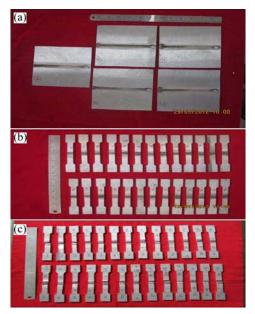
Photographs of welded joints and tensile specimen: (a) Fabricated joints; (b) Tensile specimens before tensile test; (c) Tensile specimens after tensile test
